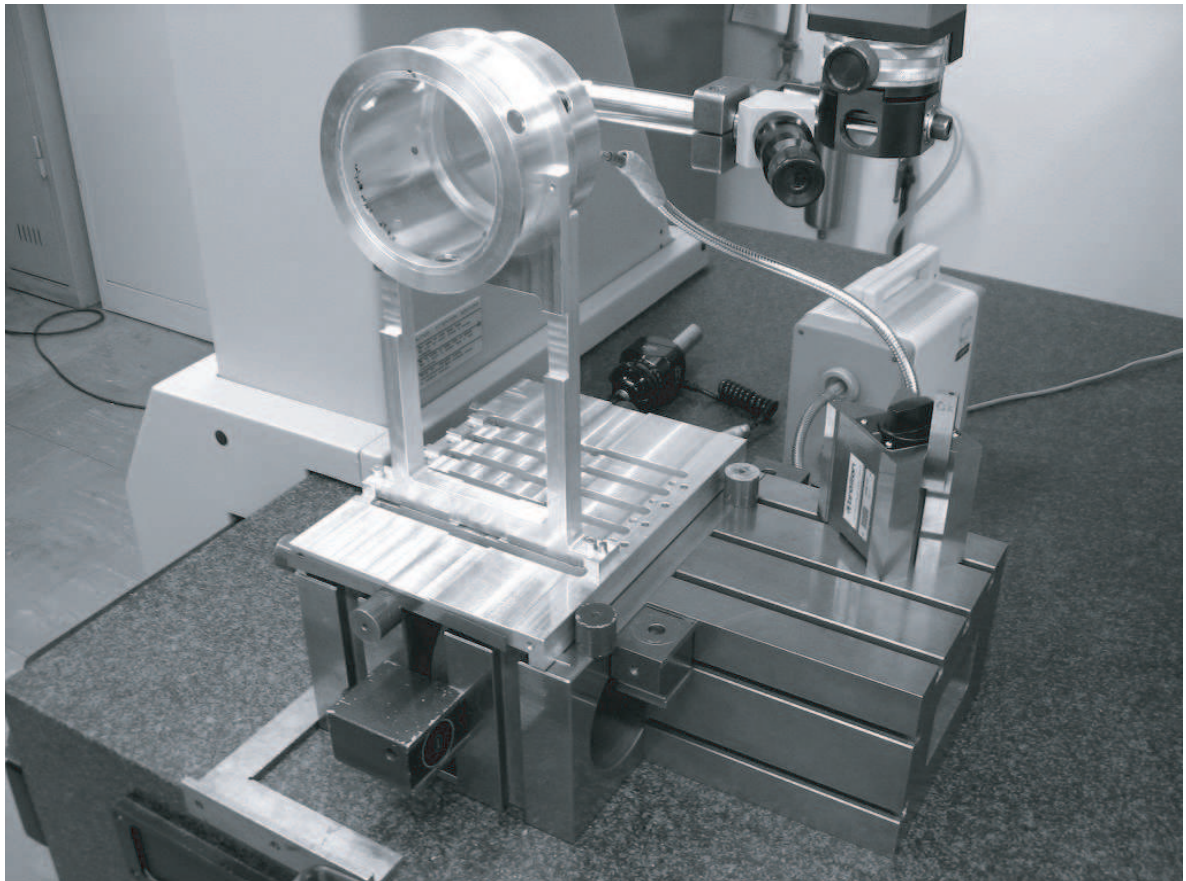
The metrology setup, with a target holder on the mock-up baseplate and the Ferranti coordinate measurement machine.
